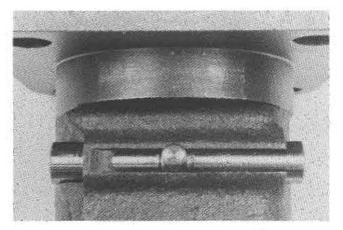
Fuel Limiting Screw Rack Alignment
